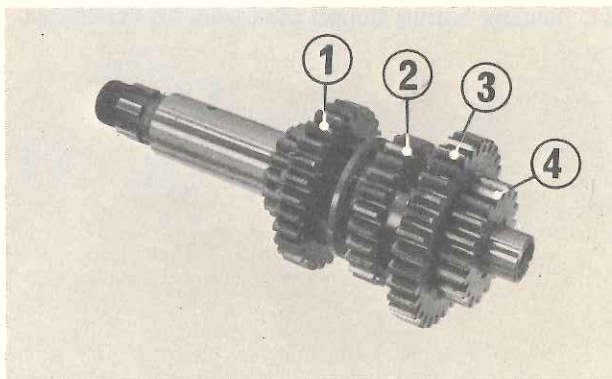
(1) Main shaft fourth gear (3) Main shaft fifth gear
